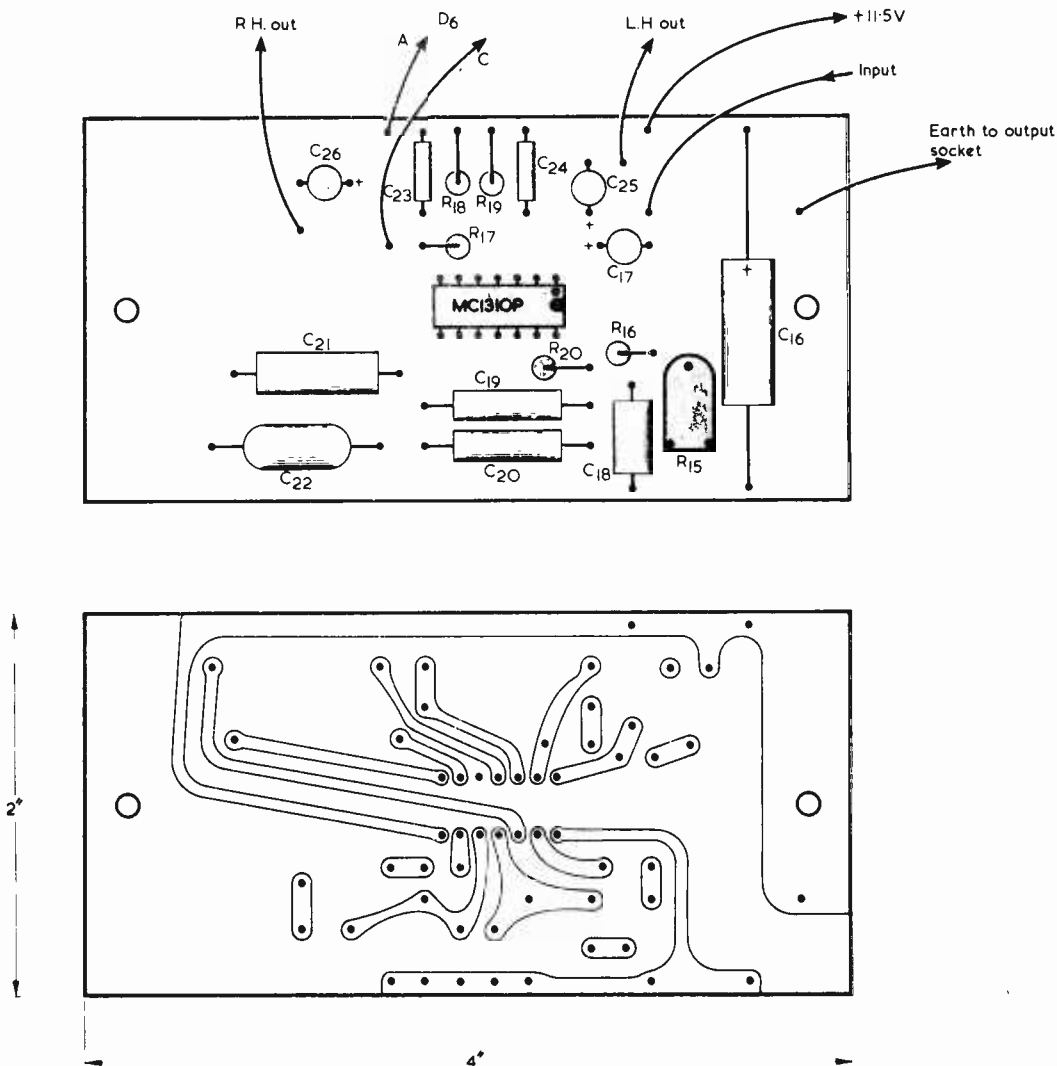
The component and copper sides of the stereo decoder board, once again reproduced full size
